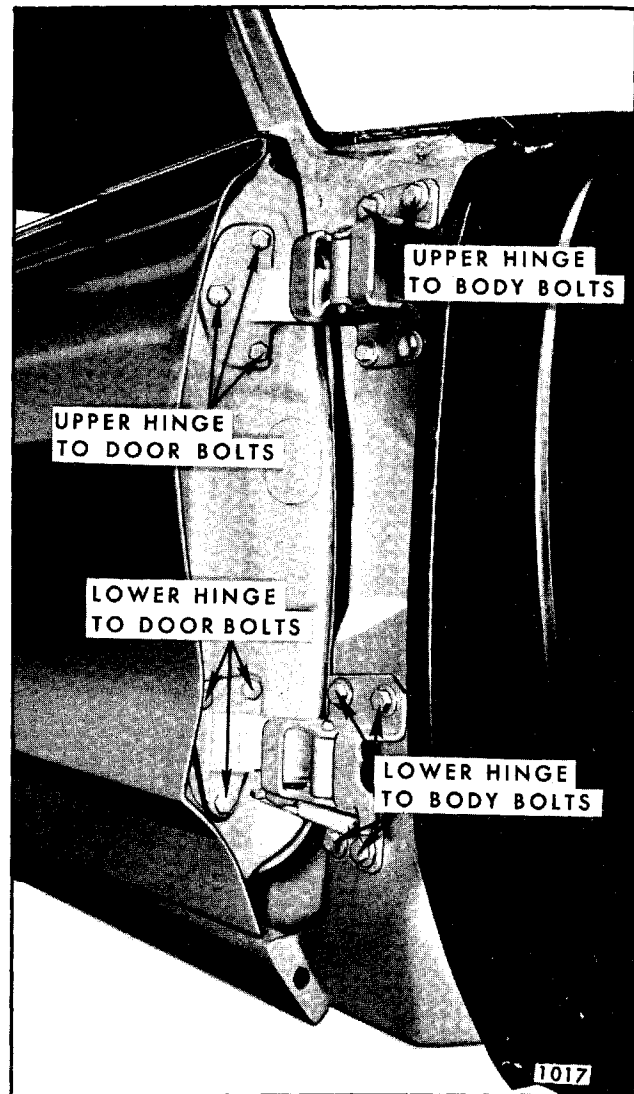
Front Door Hinge Attachment - "B-C and E" Styles
